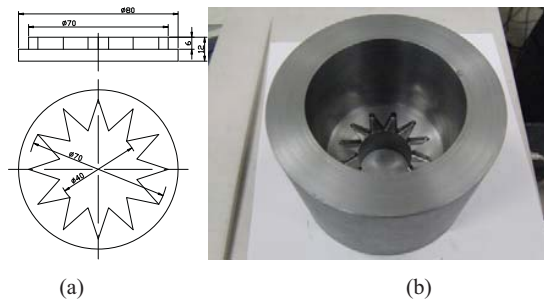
Gear type forging (a) draw of the “gear” type forging; (b) photo of the die
